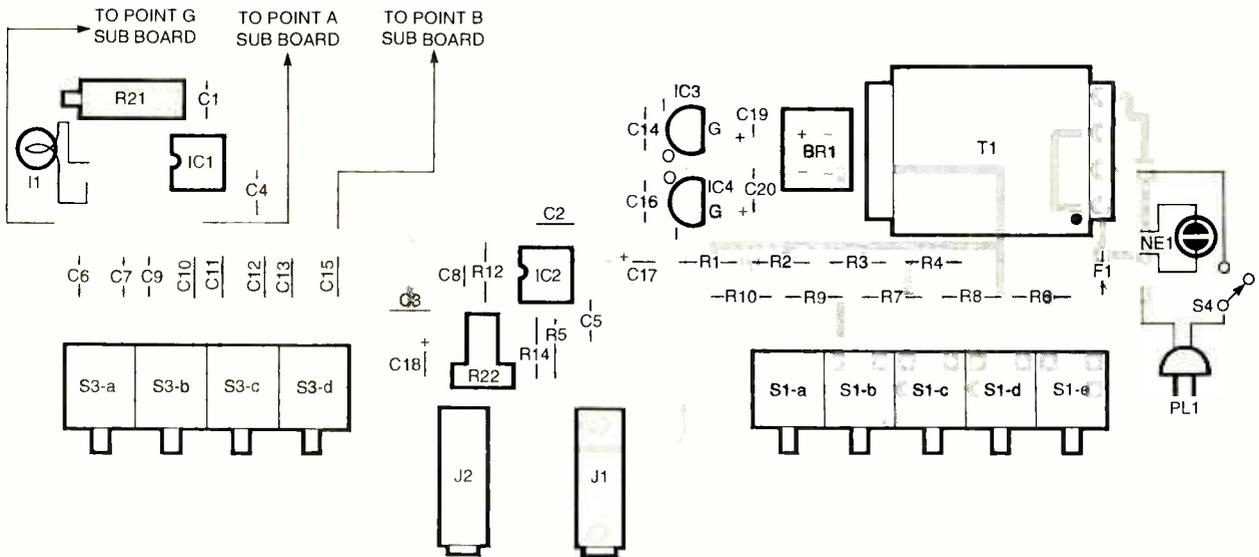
WHEN MOUNTING COMPONENTS on the main board, use this parts-placement diagram.
